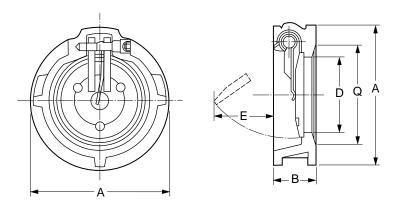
Figure 809 Valve Dimensions (Inches) Sizes 3-6 inch
